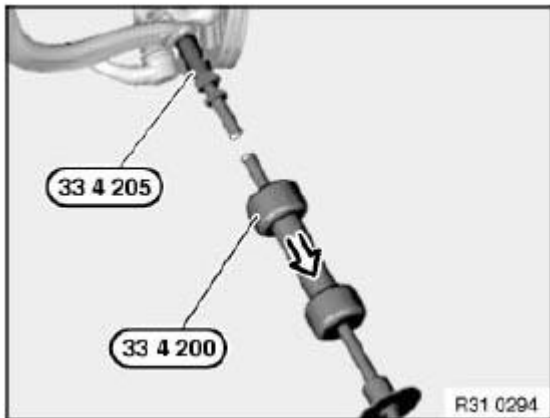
Identifying Special Tool (33 4 205) And (33 4 200)
